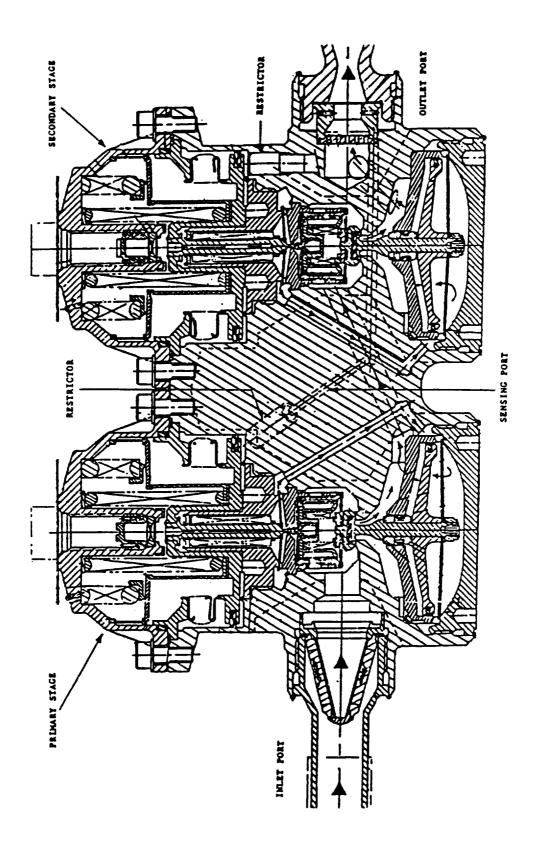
HELIUM PRESSURE REGULATOR ASSEMBLY
